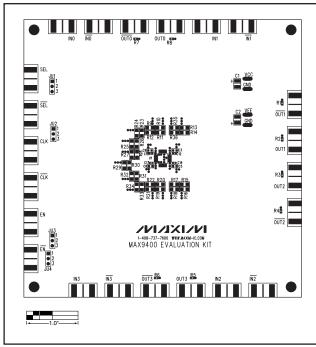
MAX9400 EV Kit Component Placement Guide—Component Side
